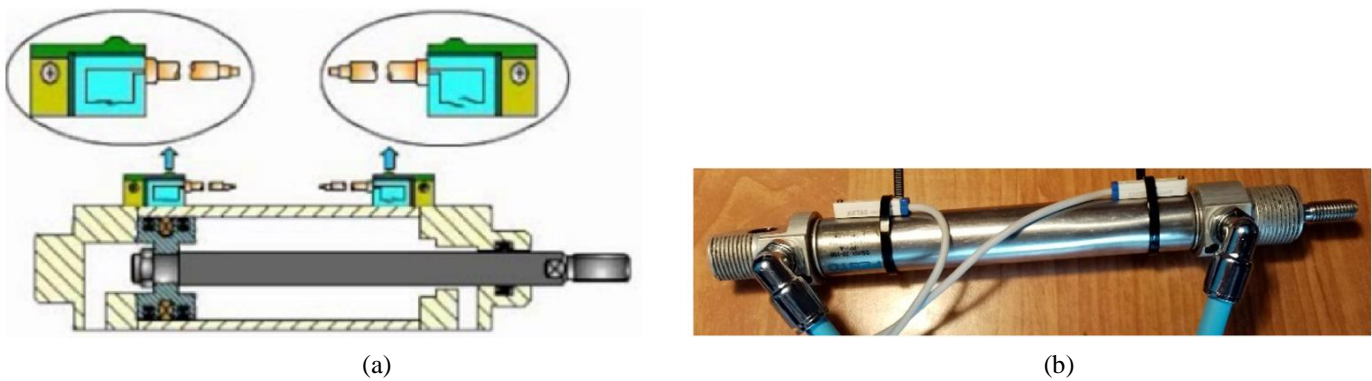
The pneumatic cylinder with double action: (a) principle scheme, AS design; (b) The physical cylinder with sensors mounted
